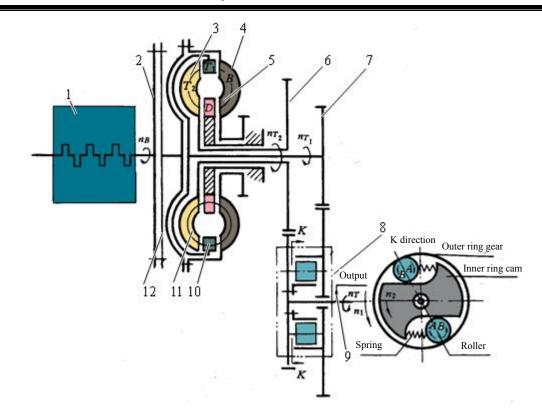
Schematic Diagram of Double-turbine Hydraulic Torque Converter 1 Engine 2 Engine flywheel 3 Wheel shell 4 Impeller 5 Stator 6 Secondary output gear 7 Primary output gear 8 Overrunning clutch 9 Transmission input shaft 10 1<sup>st</sup> stage turbine 11 2<sup>nd</sup> stage turbine 12 Elastic plate
